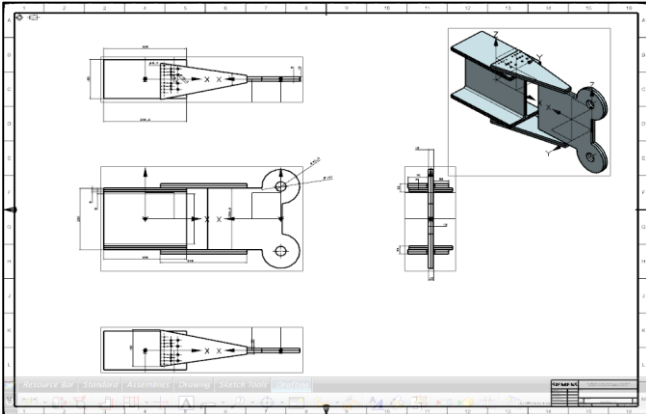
2D drawing of Fuselage Attachment Bracket
